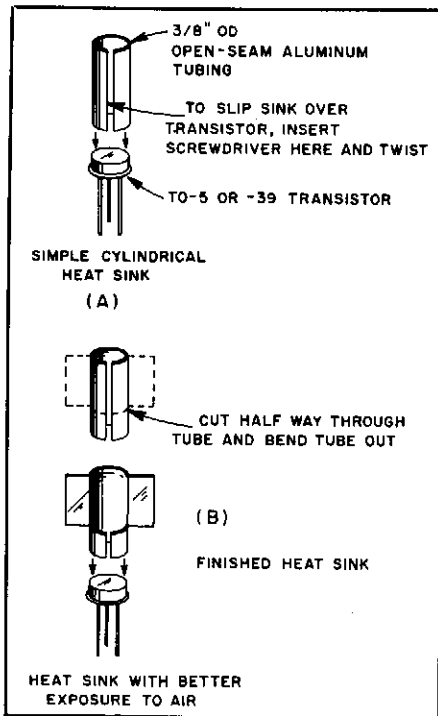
W6SPC's quick TO-5/TO-39 heat sinks from open-seam, 3/8-inch-OD aluminum tubing.
